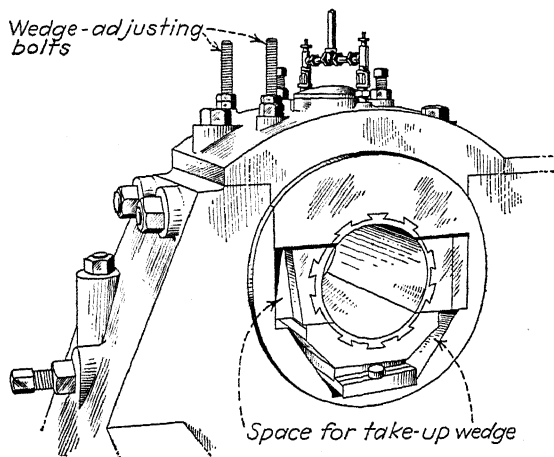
A large engine-type quarter-block shaft bearing. Accurate alignment of the shaft is secured by adjusting the wedges back of the quartered bearing shell. (Courtesy Pure Oil Company.)
